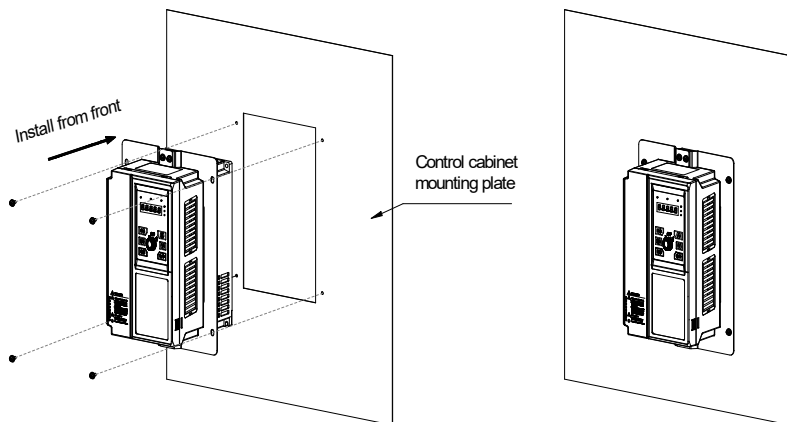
Embedded Installation Diagram of Plastic Structure
